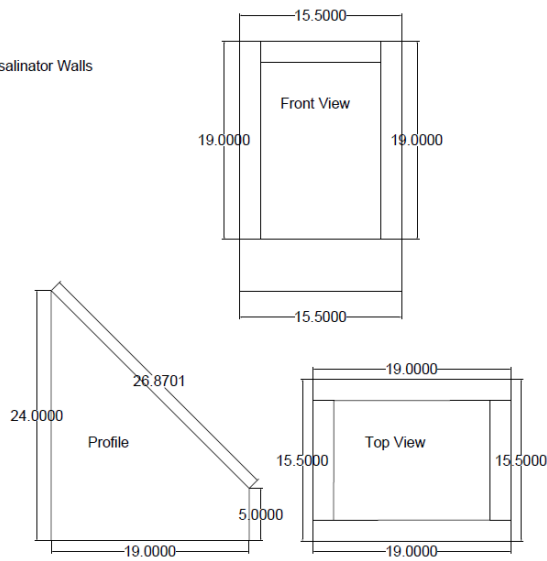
Desalinator Walls CAD. Design by Chris Koier.
